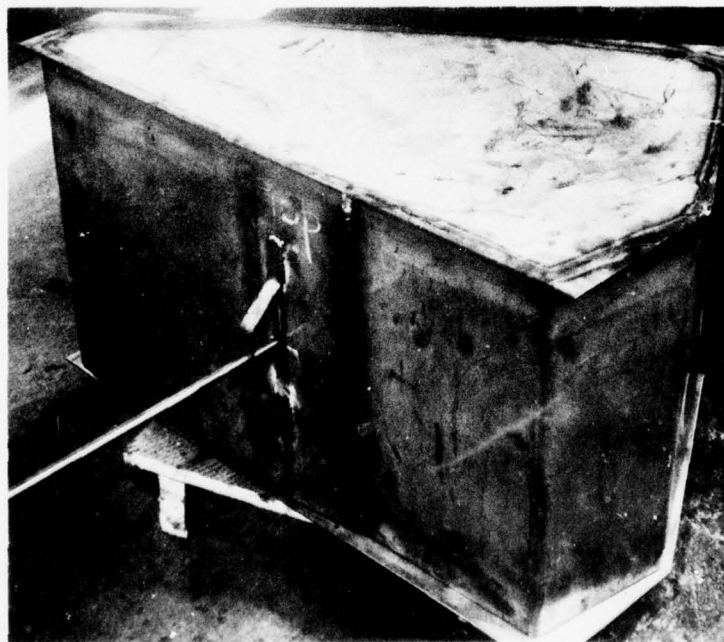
FIRST ARM SEGMENT RETORT UNIT BEFORE SEALING WITH FINAL WELD.
